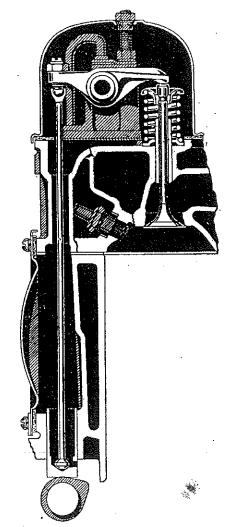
Valve mechanism on 228, 236, 248, 256, 270 & 302 engines
